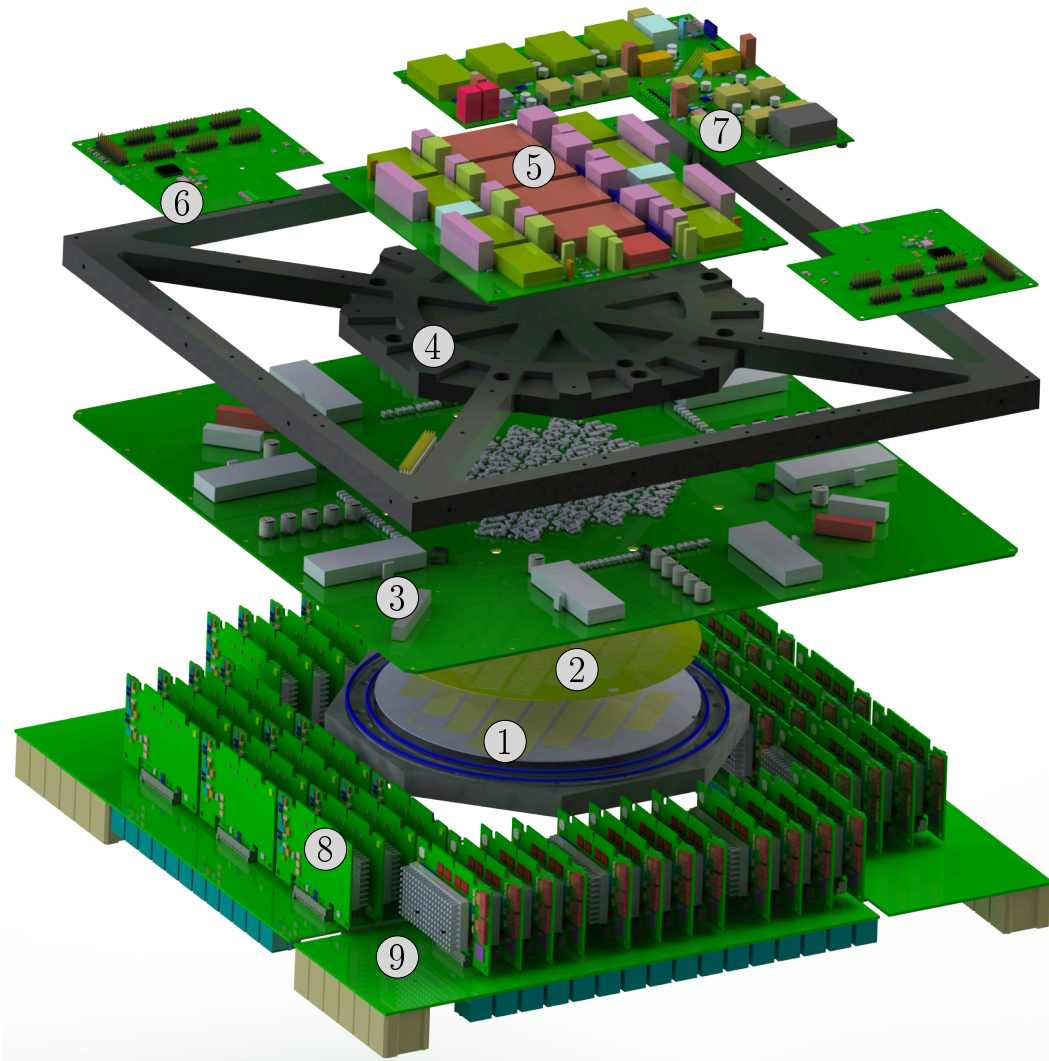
Exploded view of the BrainScaleS system. (1) Silicon wafer with the HICANN chips, (2) Positioning mask with the elastomeric strip connectors, (3) MainPCB, (4) Aluminium frame (Top Cover) for mechanical attachment and GND connection, (5) Main Power Supply PCB (PowerIt), (6) AnaB Board, (7) Auxillary Power Supply PCB (AuxPwr PCB), (8) FCP boards, (9) WIO boards. Courtesy of Dan Husmann.
